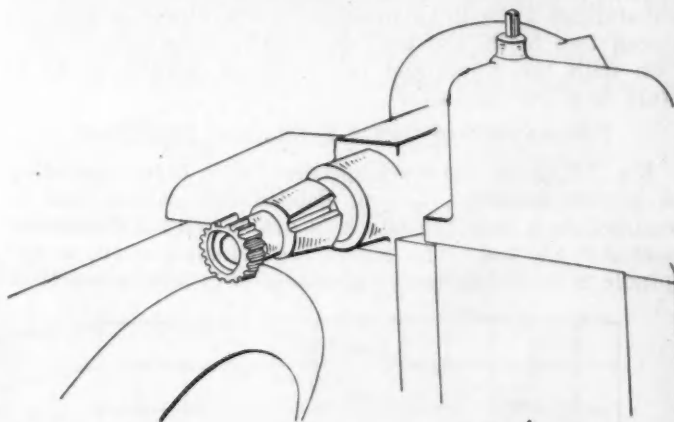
THE SLOTTED LOCATING RING ON THE ARBOR FOR LOCATING THE GEAR IN THE PROPER RELATION TO THE GRINDING WHEEL
